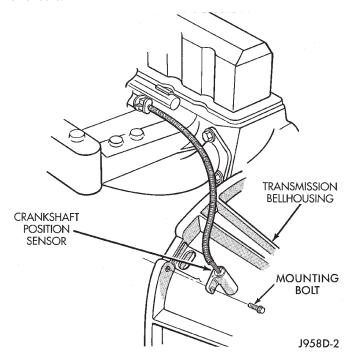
Crankshaft Position Sensor—4.0L 6-Cylinder Engine
